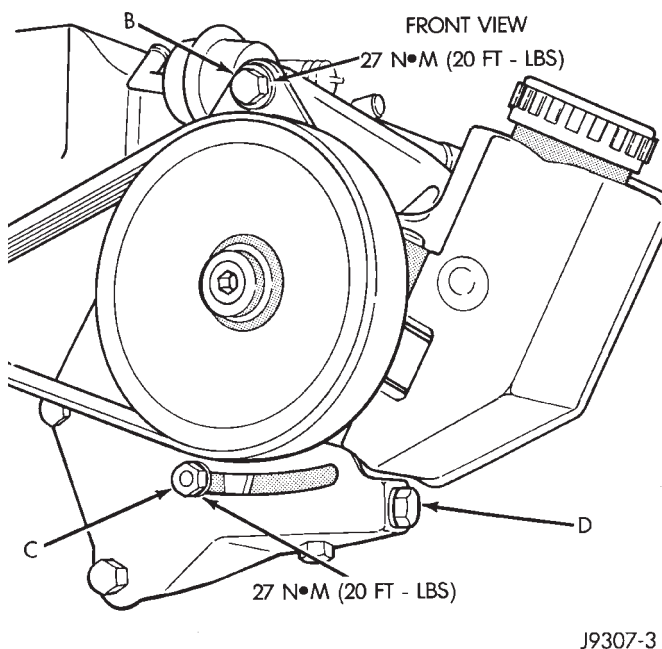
P.S. Pump Front Mounting Bolt/Locknut—4.0L Engine
